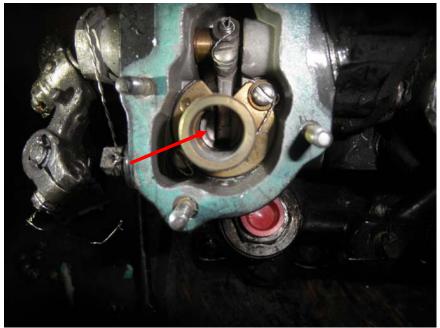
Close up view of No. 3 engine's carburetor idle jet chamber showing corrosion.
